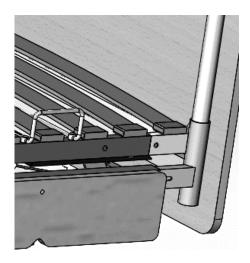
Assembly of the head part extensions (210 cm lying surface length)
